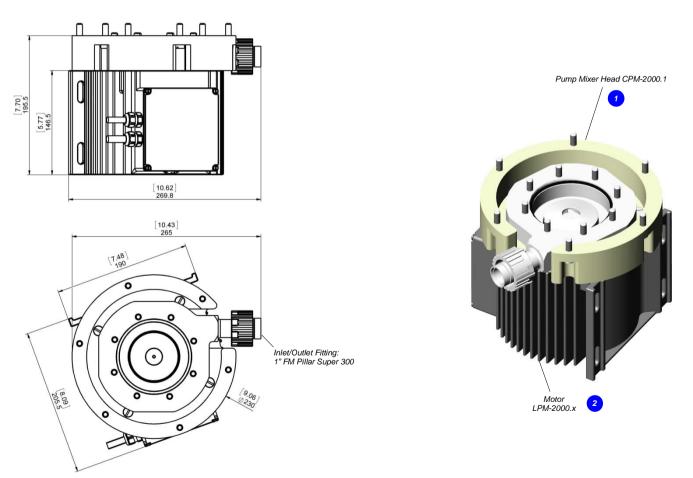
Basic dimensions of motor LPM-2000 with pump mixer head CPM-2000.1
